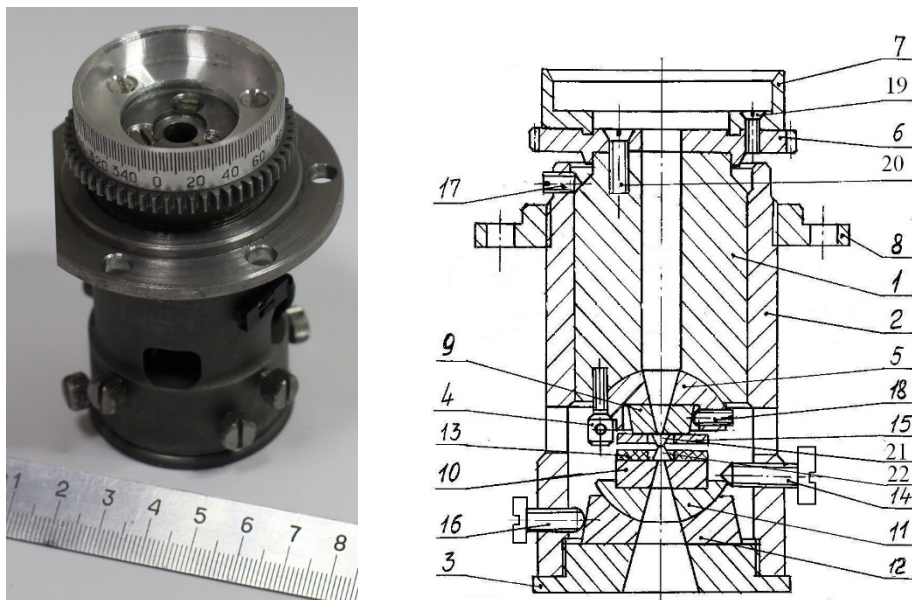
Rotational diamond anvil cell (RDAC). 1 – moving piston; 2 – frame; 3 – bottom; 4 – screw; 5 – upper half-spherical seat; 6 – gear; 7 – limb; 8 – flange; 9 – upper seat; 10 – lower seat; 11 – lower half-spherical seat; 12 - half-spherical seat; 13 – foil-coated textolite plate; 14 – screw; 15 – metal plate; 16 – 20 - screws; 21 – moving diamond anvil; 2 – diamond anvil.
